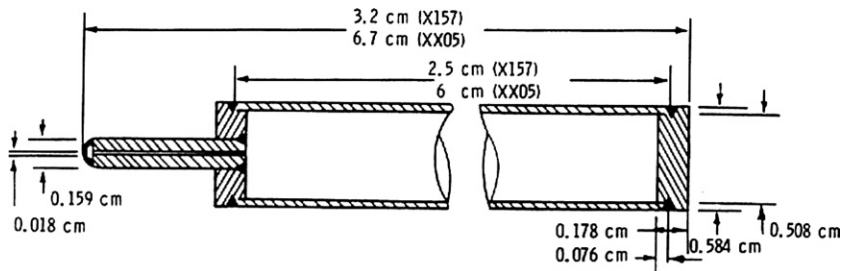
Pressurized tube specimen design for Test P-1 (EBR-II Subassembly X157) and Test P-5 (EBR-II Subassembly XX05).
